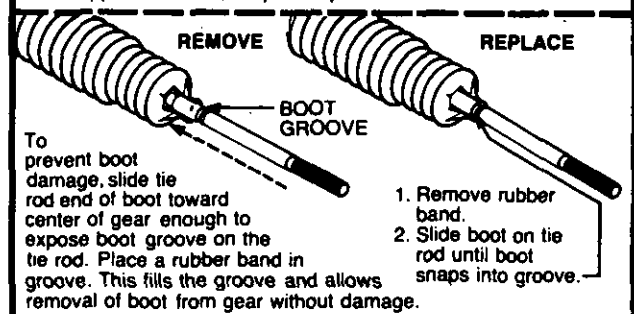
Manual Rack and Pinion Assembly Service - Chart A
